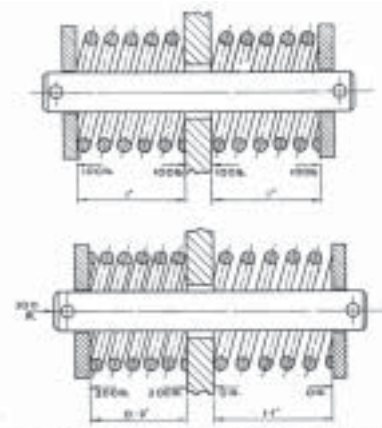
DIAGRAM ILLUSTRATING PRINCIPLE UNDERLYING PRELOADING OF BALL AND ROLLER BEARINGS
